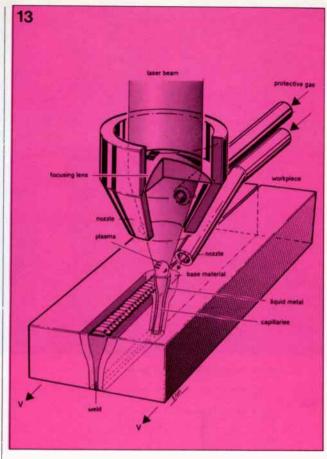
Illustrating the operation of a CO $_{\rm 2}$ laser in industrial welding.
